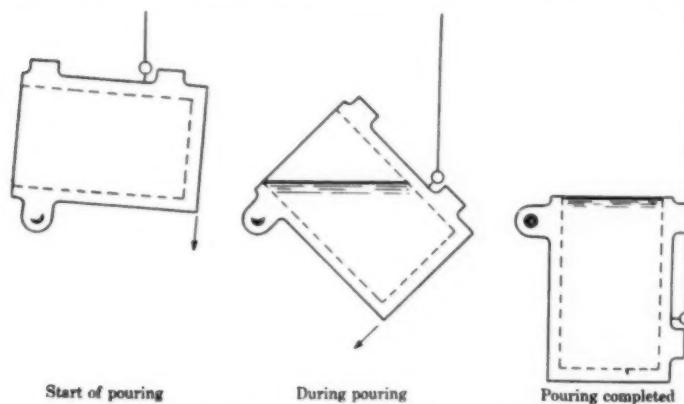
Representation of positions of a tilting book mould during pouring.
